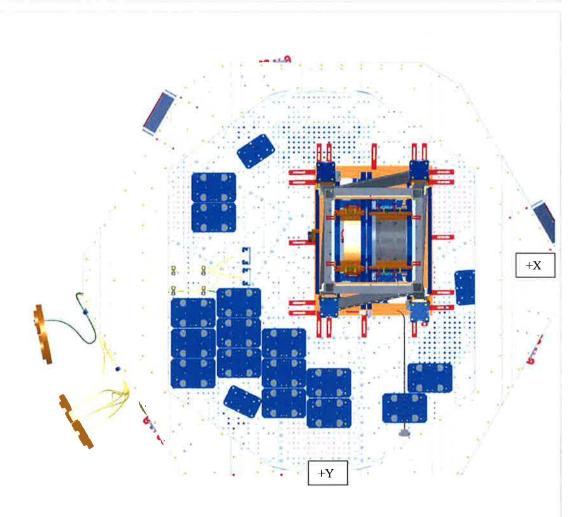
LBSC3 top-level assembly, bottom view looking up. Refer to D0900492: <u>aLIGO Systems, BSC3-L1 Top Level Chamber Assembly</u> (No Arm Cavity baffle as view is of test stand configuration.)
